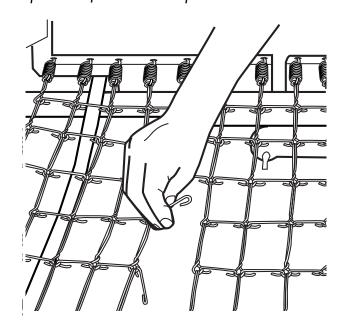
ATTACHING LINKS FROM HEAD SPRING TO FOOT SPRING
